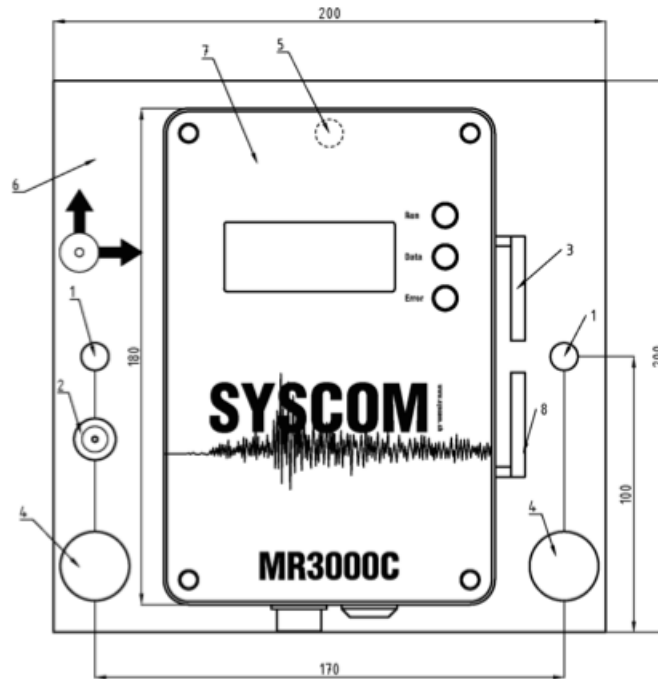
Mechanical drawing of the MR3000 - Top View
